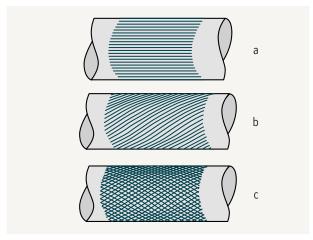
Fluting of the bottom rollers a) axial flutes, b) inclined flutes (spiral flutes), c) knurled fluting
